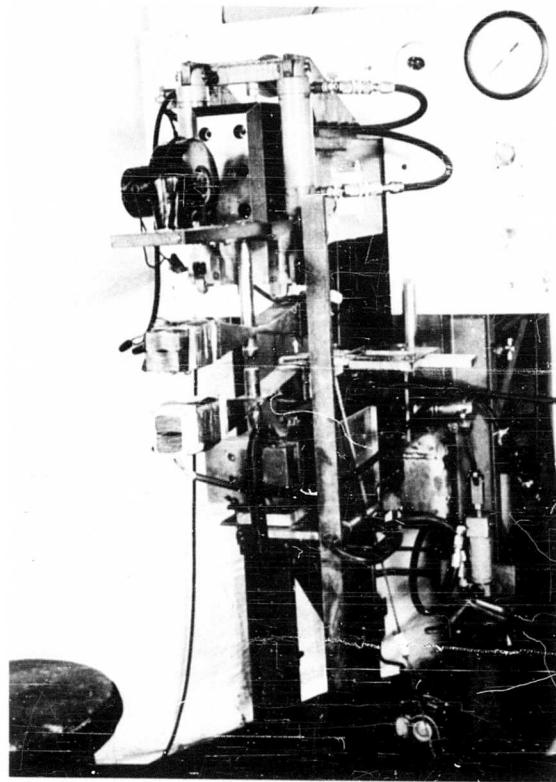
EXPERIMENTAL 8-KILOWATT ULTRASONIC SPOT WELDING MACHINE
